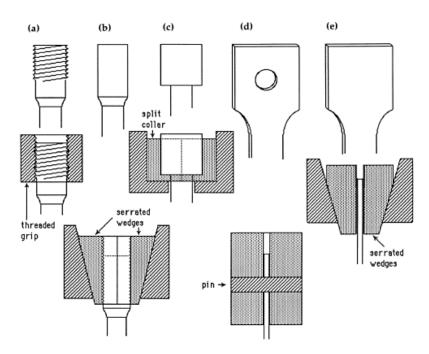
Systems for gripping tensile specimens. For round specimens, these include threaded grips (a), serrated wedges (b), and, for butt end specimens, split collars constrained by a solid collar (c). Sheet specimens may be gripped with pins (d) or serrated wedges (e).
